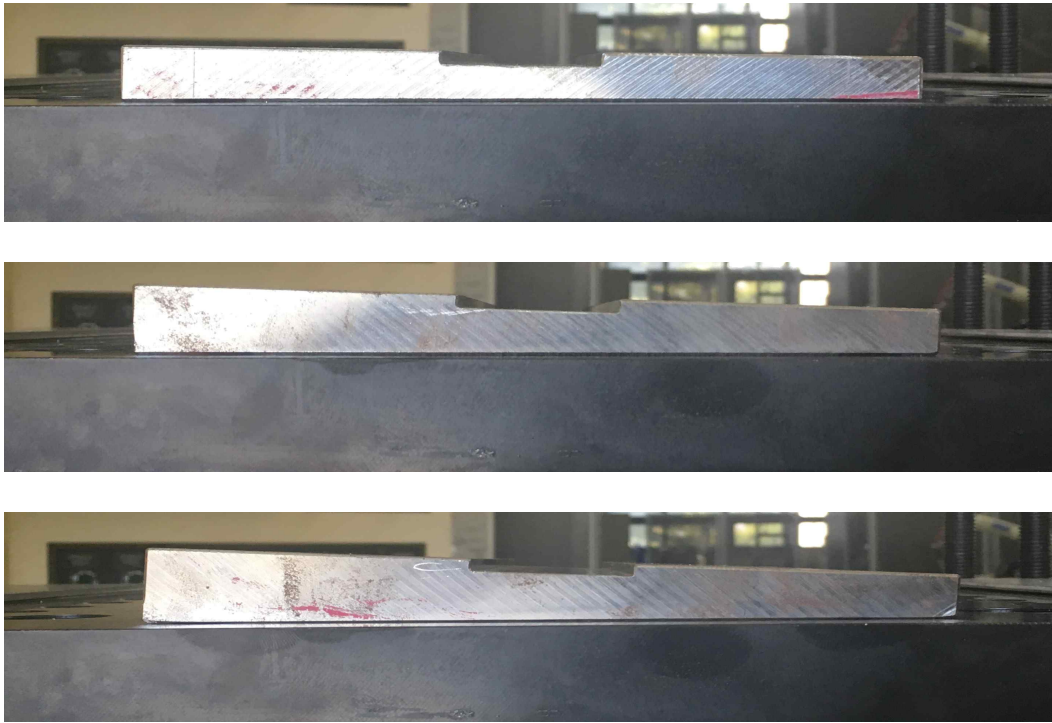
Jig used for friction stir welding of Al5052 with different thick sheets
